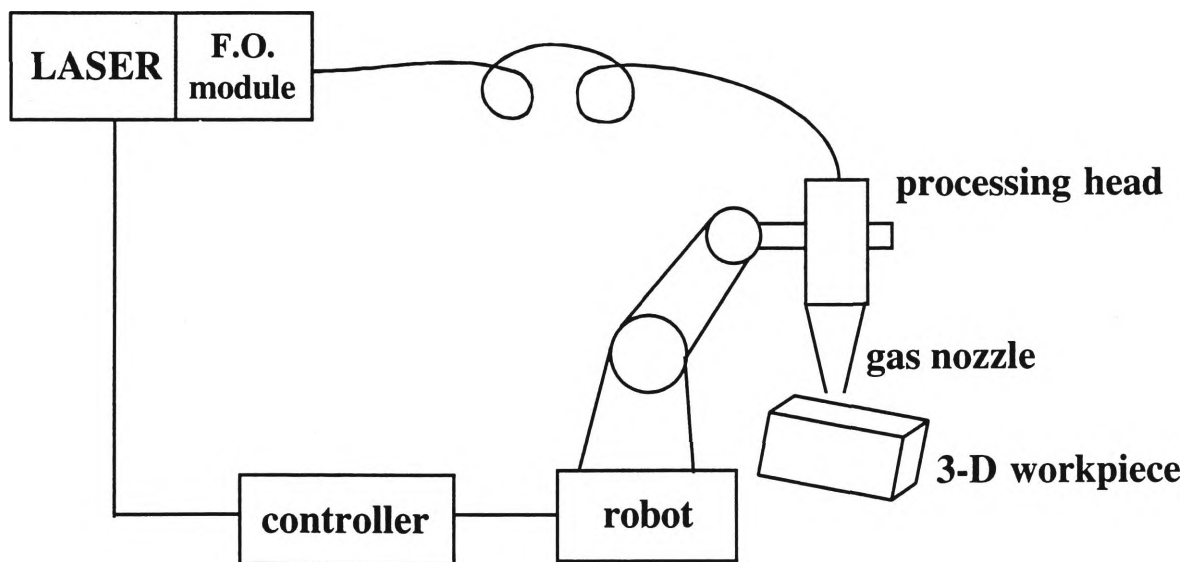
Fibre-optic laser welding with a robot.
